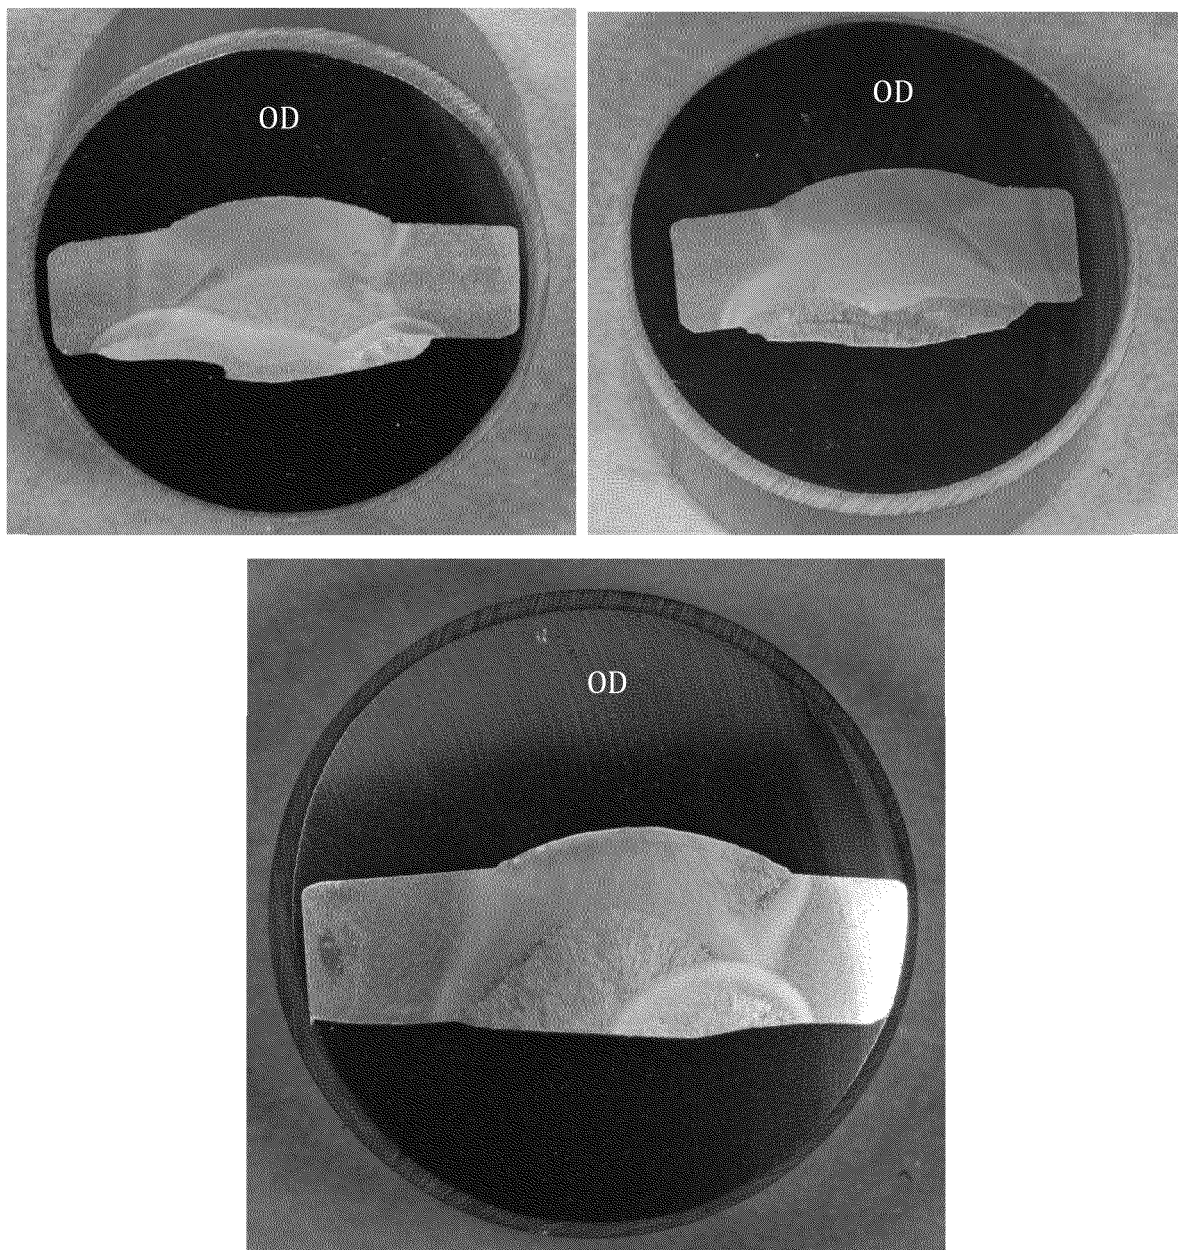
Images of metallographic cross-sections showing ID repair welds.
